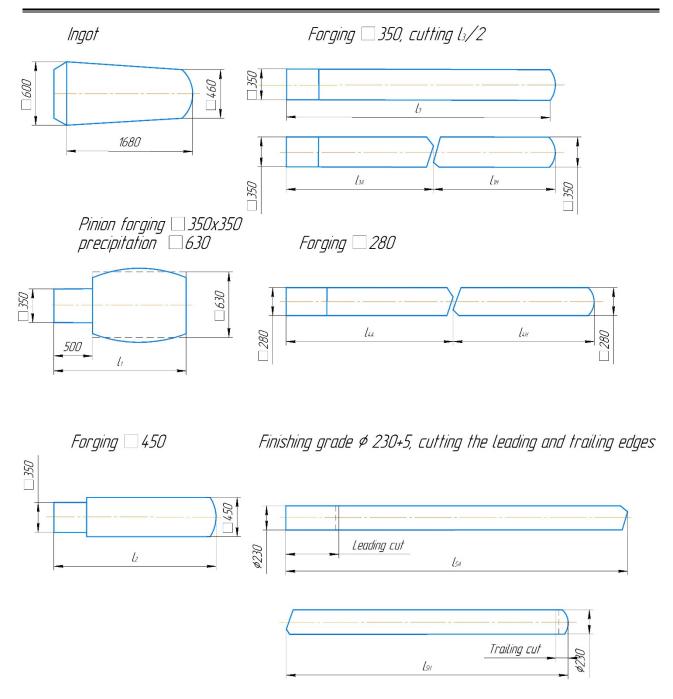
Diagram of forging cylindrical bars from tool alloy steel (using the example of steels 4X5MΦ1C, X12MΦ, 9Γ2Φ)
